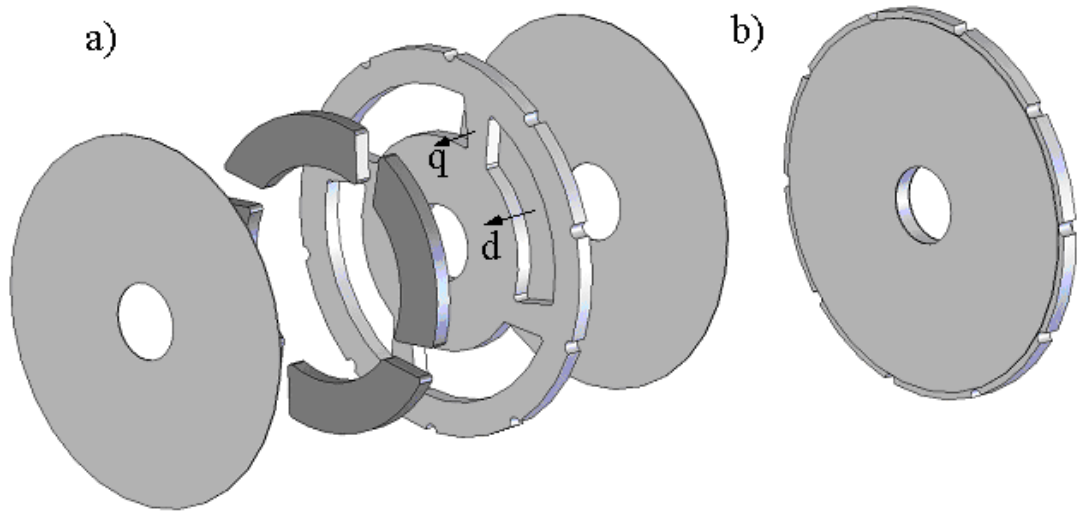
Rotor construction of AFPMSG1. Magnets are surrounded by an aluminium rotor frame called installation jig which aligns the magnets into correct position. Aluminium surface plates are installed on both sides of the disc rotor. a) Exploded view. b) Assembled rotor.
